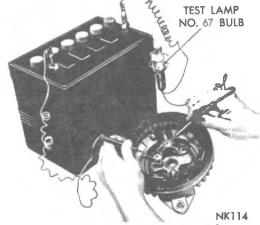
Testing rectifiers with test lamp (Tool C-744).
